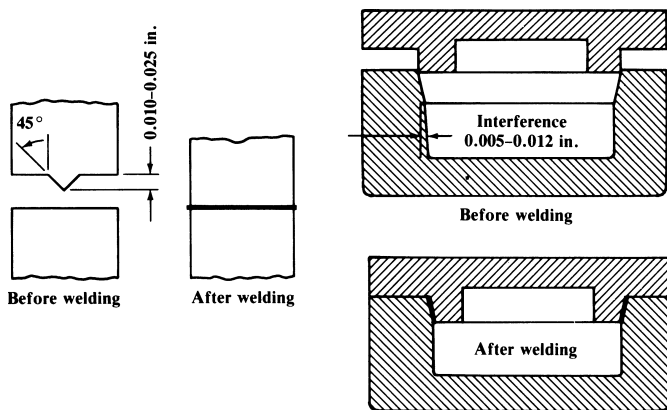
(left) Energy Director Types of Ultrasonic Weld Joint Designs for Assembly of Plastics Moldings, and (right) Typical Shear Interference
